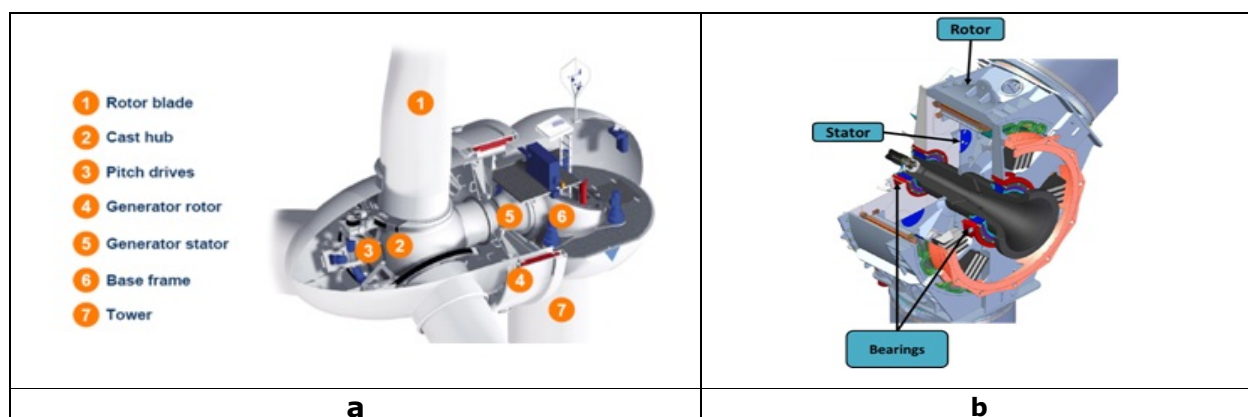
Schematics (a) Wind turbine and its components; (b) Assembled generator with rotor and stator
